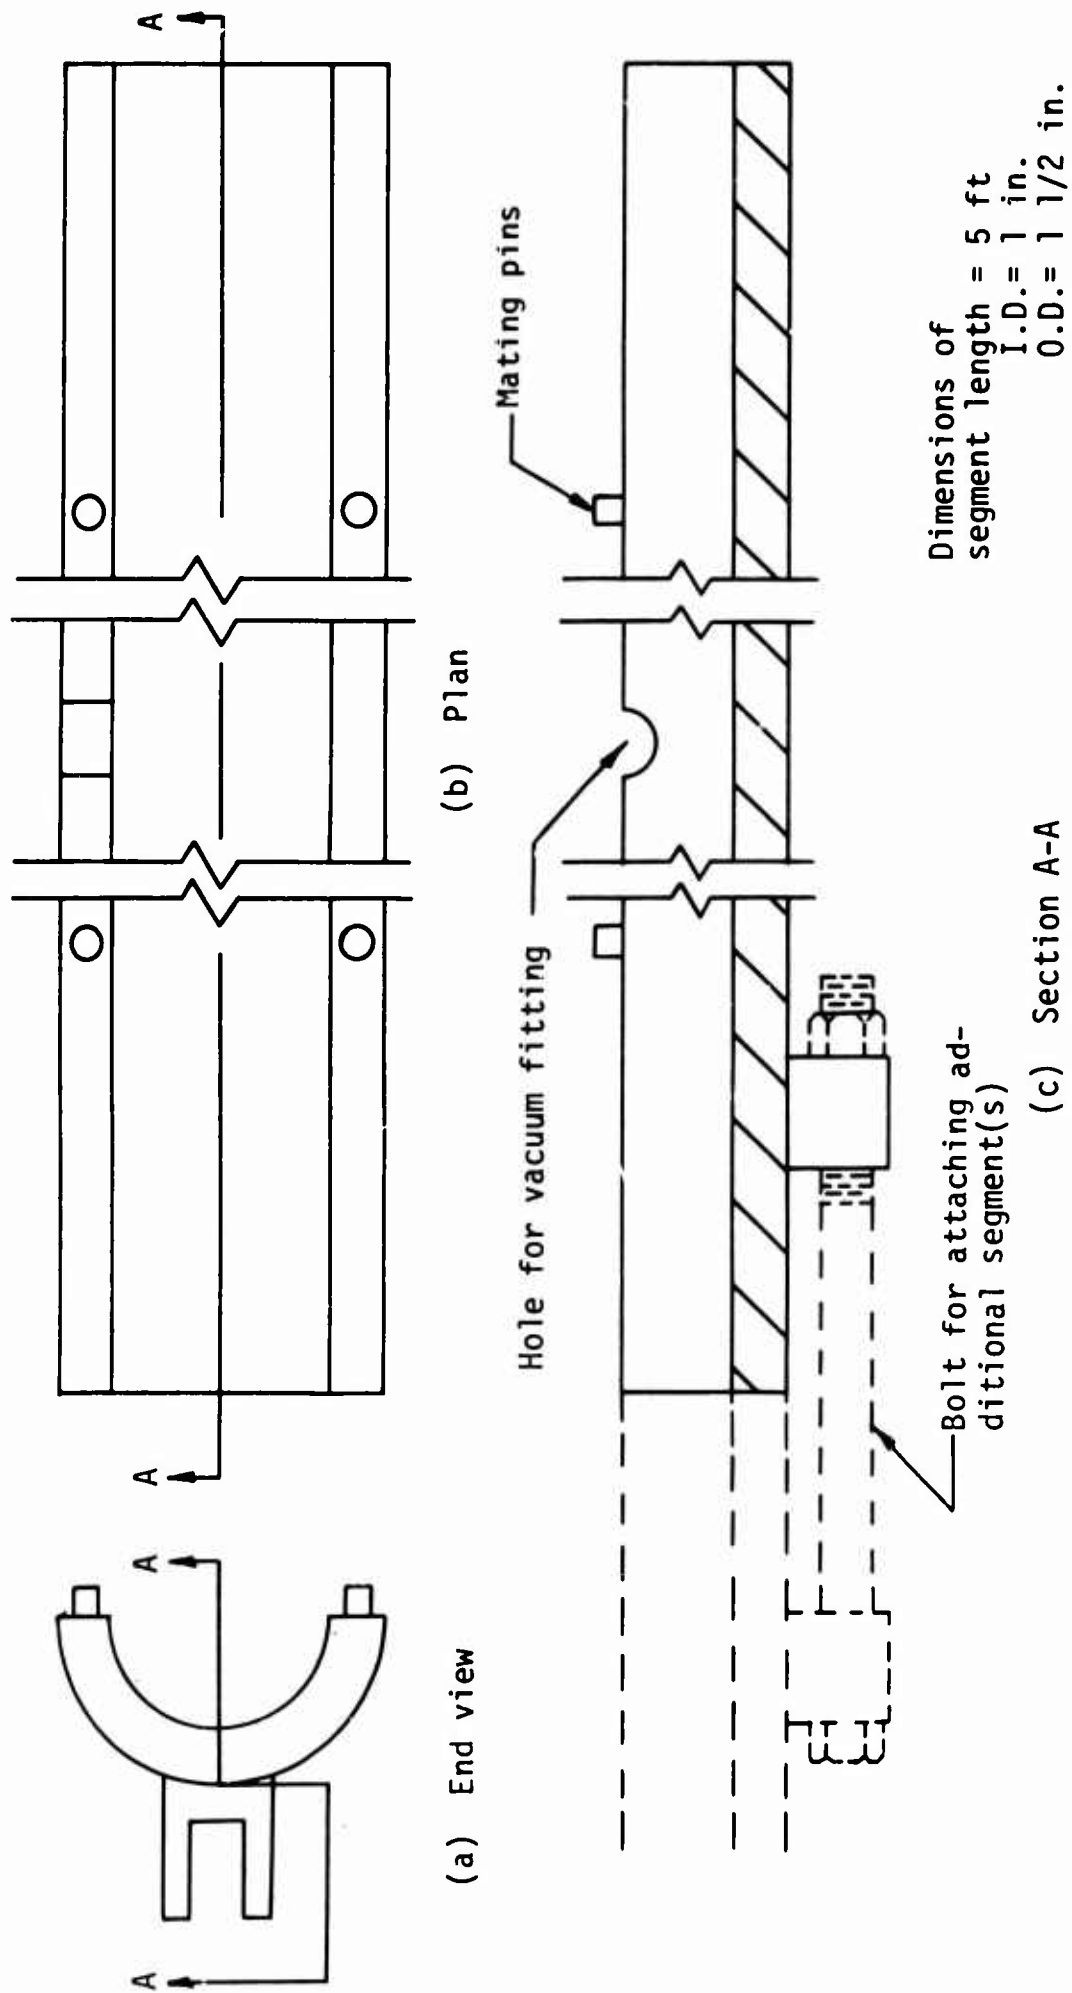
Drawing of specimen mold (each segment has two halves, identical except for mating pins or holes)
